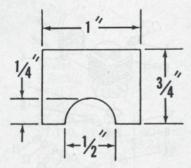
Shims used in crankshaft assembly may be made by cutting 0.0125 inch thick plastic, metal or other suitable material in the outline shown above. Refer to Fig. HL40-7 and text.
